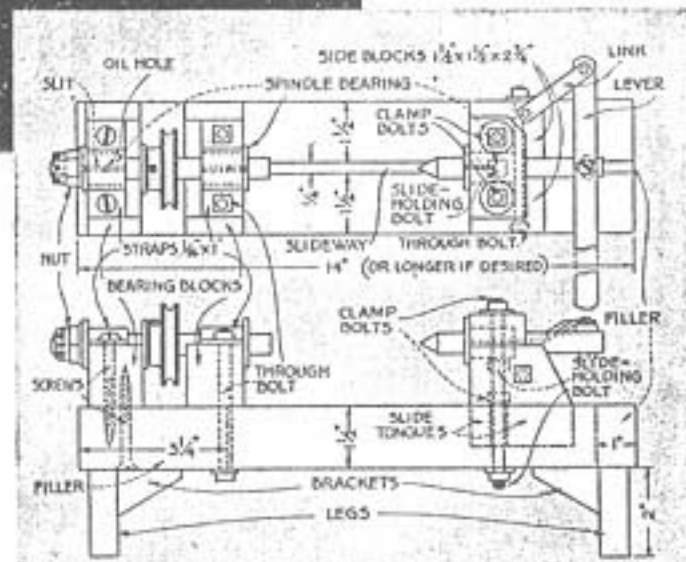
Aside from being a toy reproduction of a lathe, this small machine can be used in making ship model sheave, capstans, and the like.
